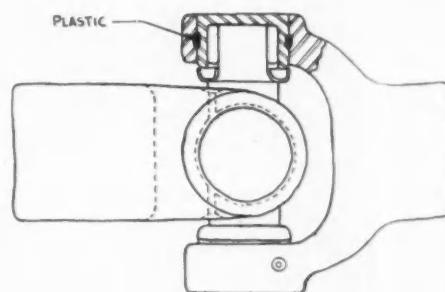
(below) - General design of German universal joints which incorporated a novel plastic bearing race retainer
